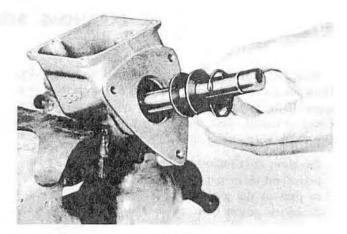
Adding Washers and Retaining Ring After Piston and Seal Installation
